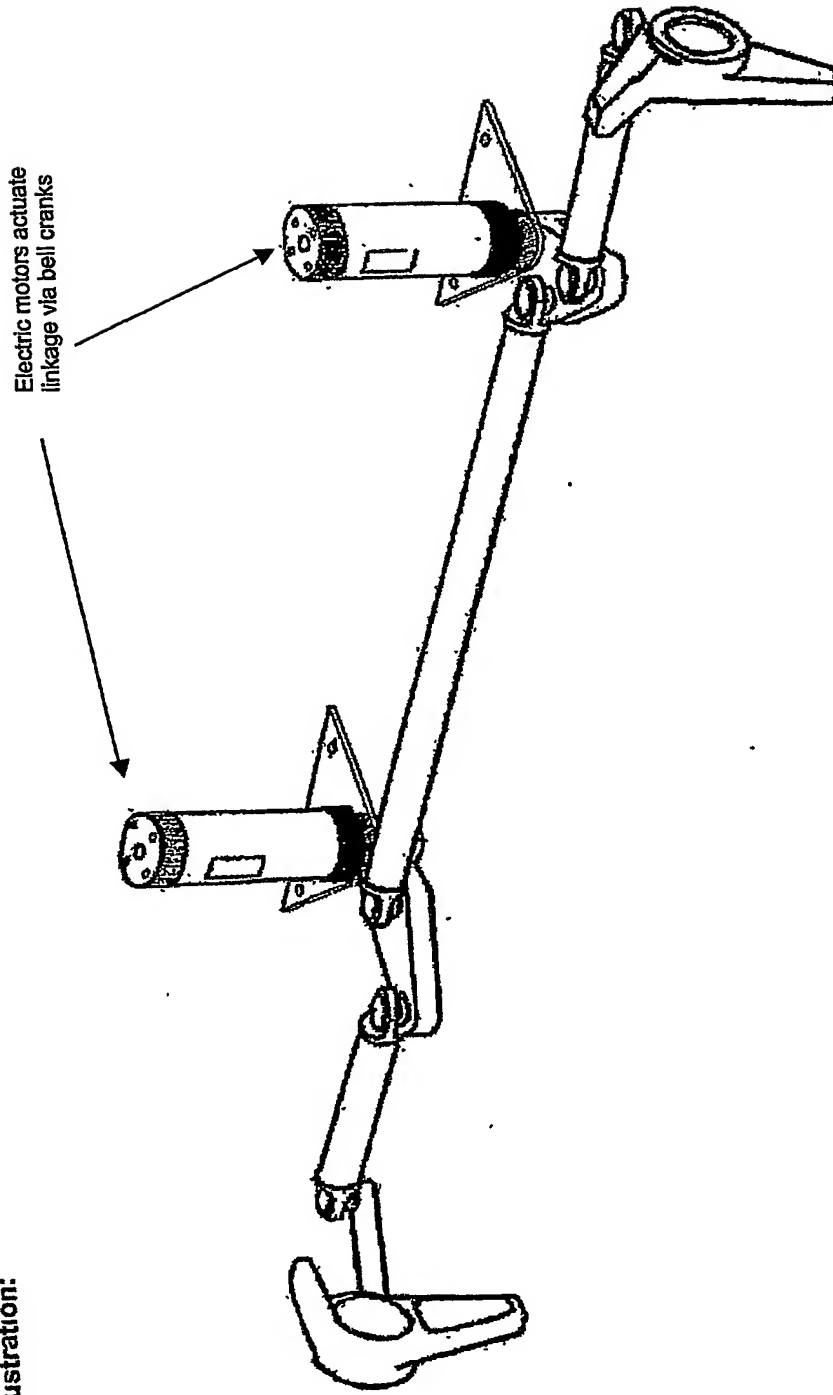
CATIA model of composite steering links and bell cranks connected to steering knuckles which attach to the front wheels. The electric actuating motors would attach to spindles attached to the bell cranks
